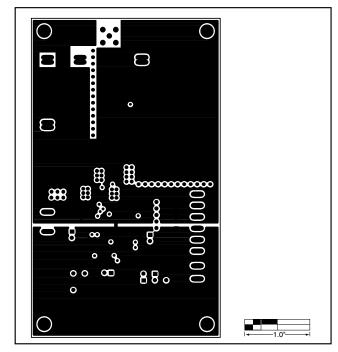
MAX1855 EV Kit PC Board Layout—Layers 2 and 3
